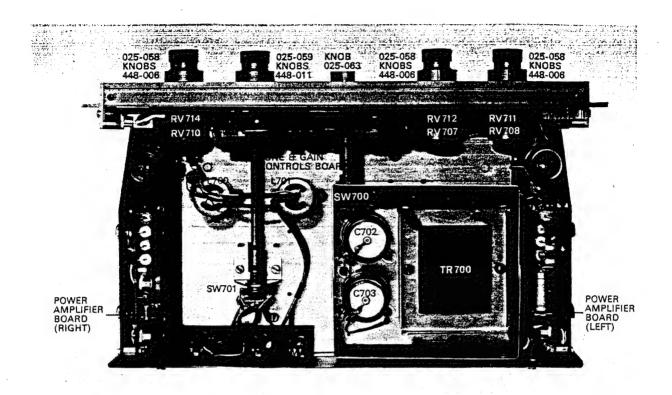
AMPLIFIER CHASSIS — TOP VIEW
